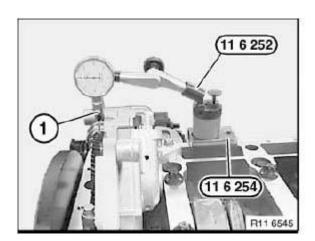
Mounting Special Tool (11 6 254) On Crankcase Courtesy of BMW OF NORTH AMERICA, INC.
